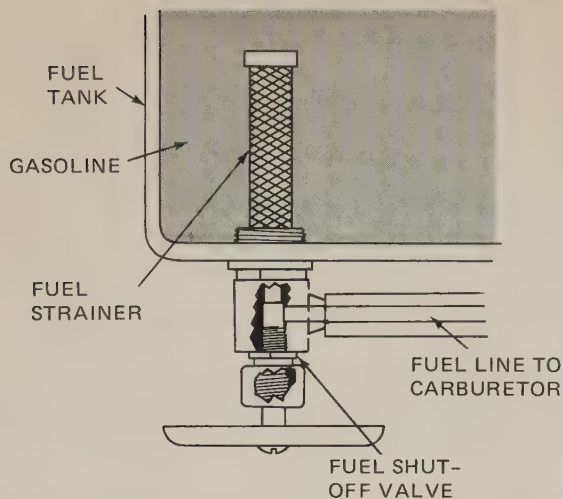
Fuel strainer of type mounted inside the fuel tank.
